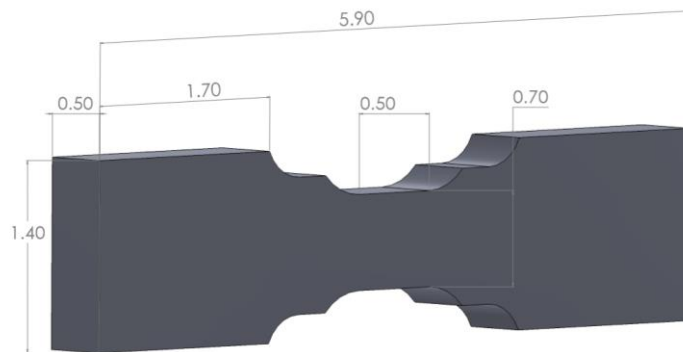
KB fatigue specimen geometry. Dimensions shown in inches.
